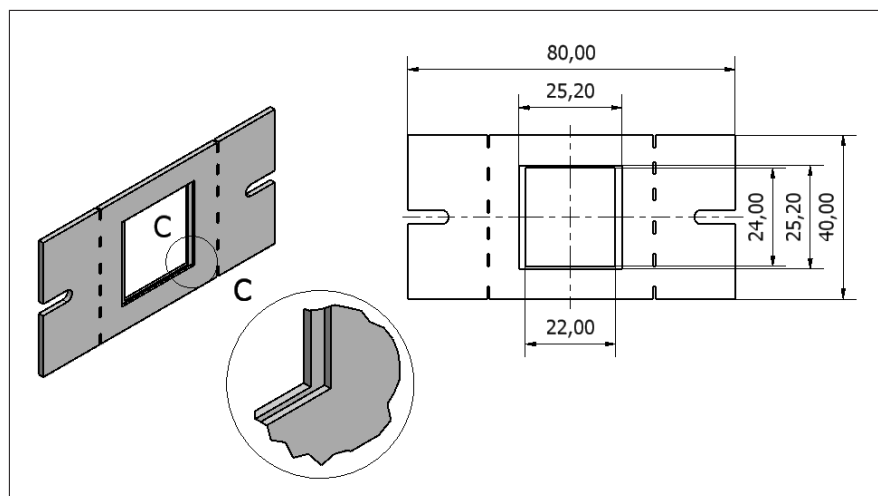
Mask 3. Used to deposit C₆₀ on top of the CuPc. Dimensioned that a 22 mm × 24 mm area of C₆₀ could be deposited to ensure that the C₆₀ did not overlap the CuPc layer.
